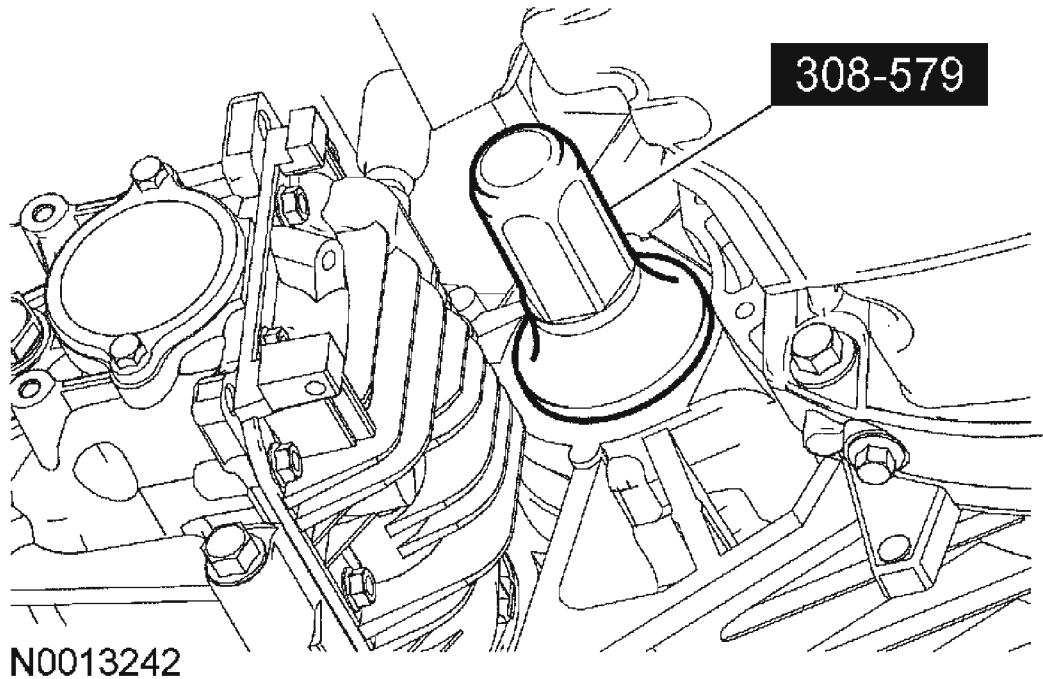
Removing RH Intermediate Shaft Oil Seal
